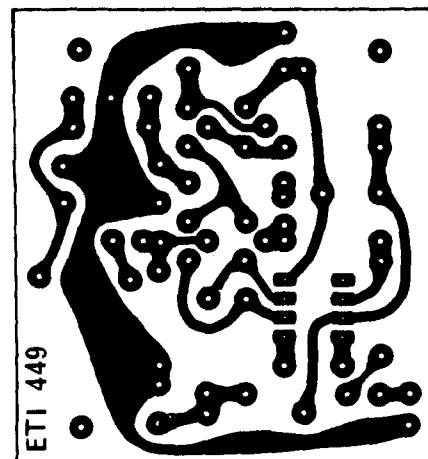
Printed Circuit board layout. Full size 60 x 55 mm
